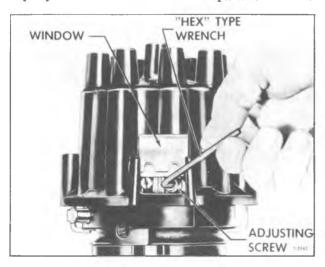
Setting Dwell Angle (V8 Engine) (Typical)
